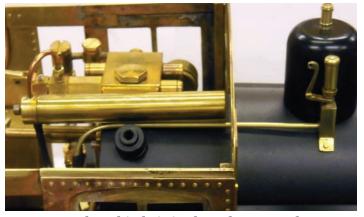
The whistle is in the cab next to the steam manifold, which makes for a short steam tube and less condensation. An additional tube goes to the dummy whistle next to the dome so it shoots out steam when the whistle blows.
